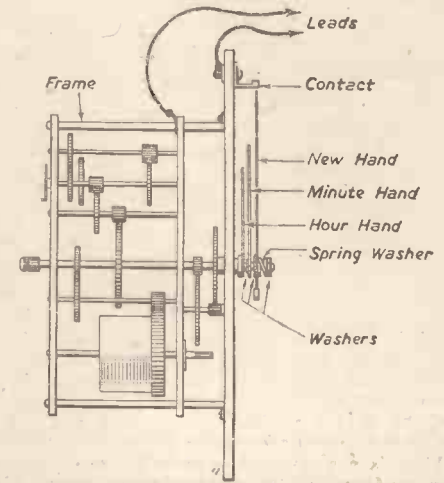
Side view of the clock mechanism showing the additional hand and washers.
